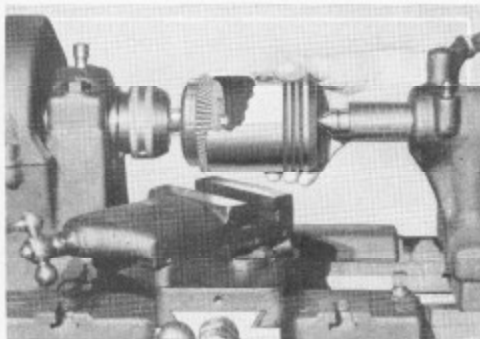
Reaming Bevel of Piston Skirt in the Lathe
